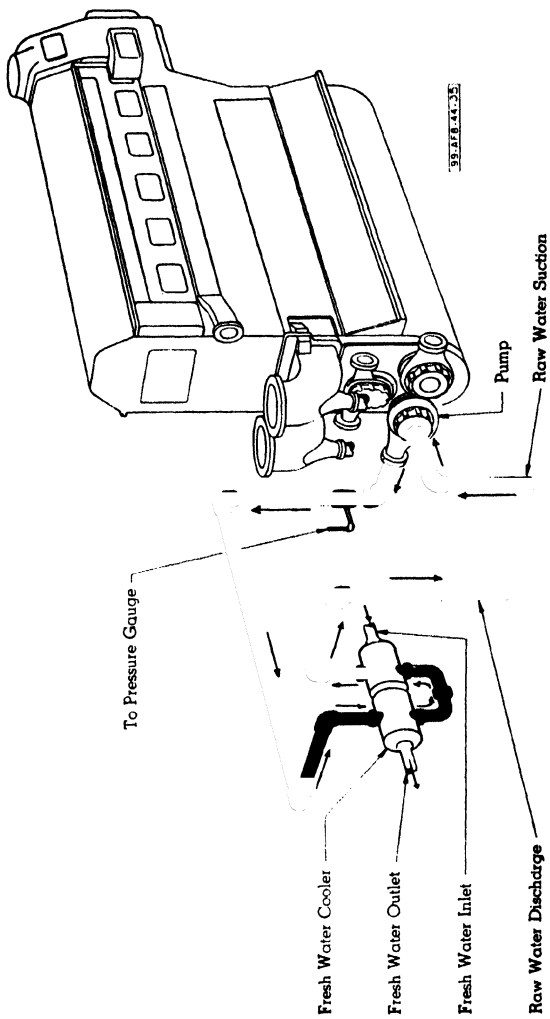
Fairbanks Morse opposed-piston engine—layout of open, or raw-water, cooling system.
